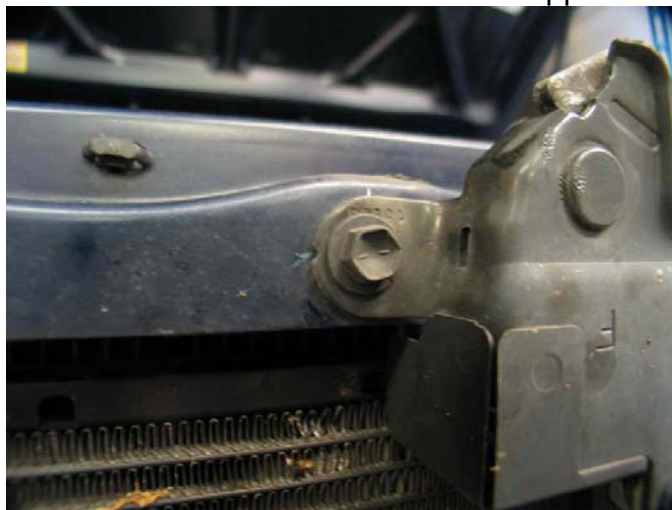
& 3: Layout of the Tundra front end. Cooler is way too big to fit to the left of the center brace; horn has to be relocated to make mounting on the right side possible.
